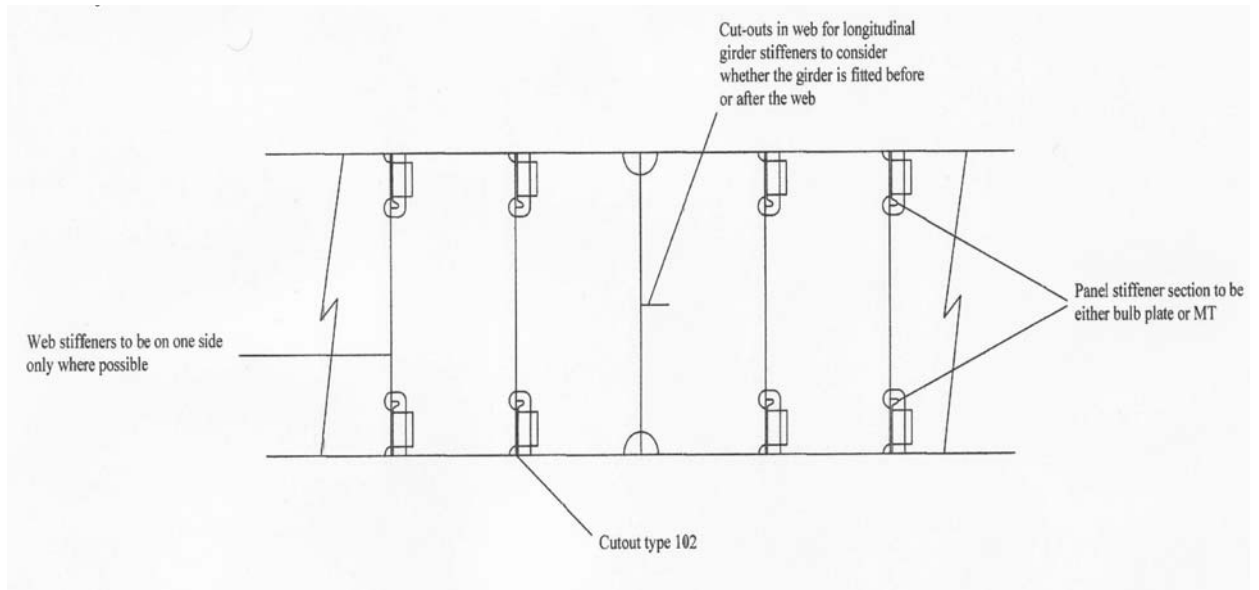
Guidelines for flat double skin block assembly [17]
